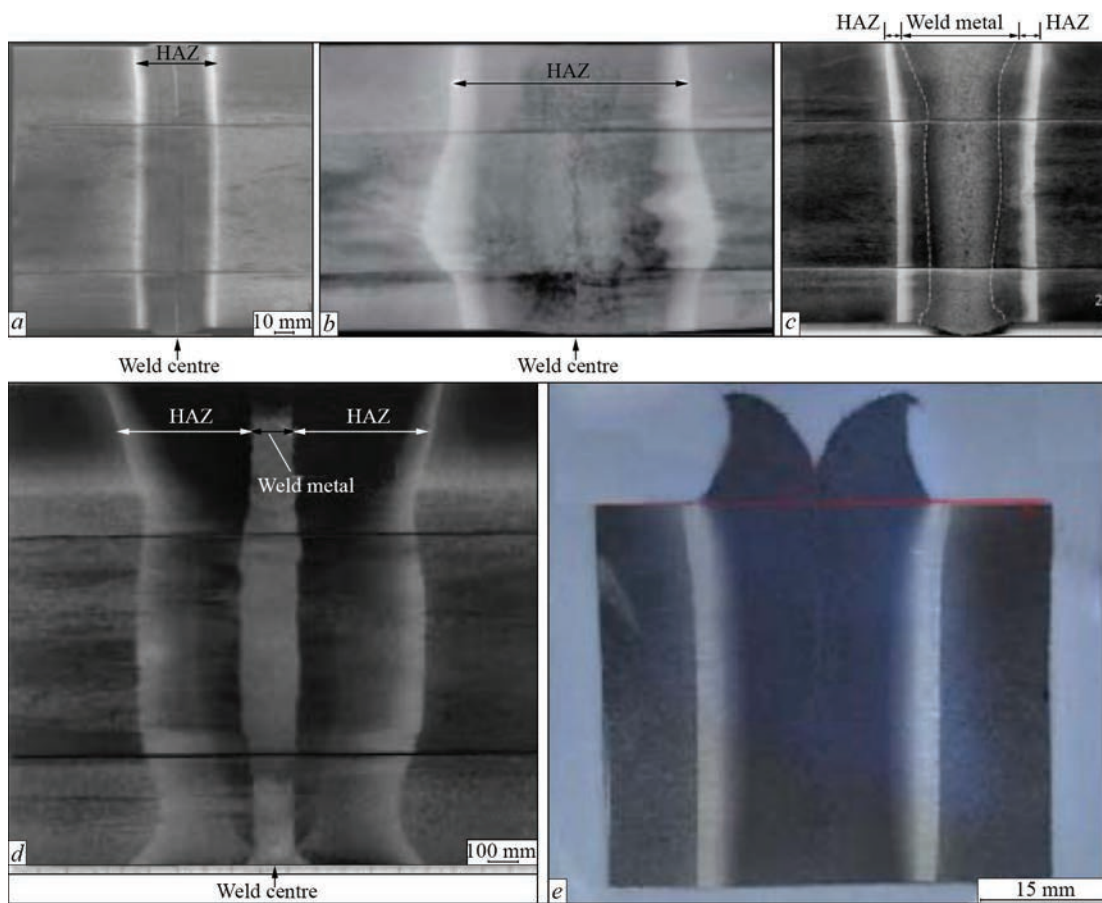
Macrostructures of welded rail joint made by different methods [17]: *a* — flash-butt welding; *b* — gas-pressure welding; *c* — aluminothermic welding; *d* — hidden arc welding; *e* — linear friction welding
